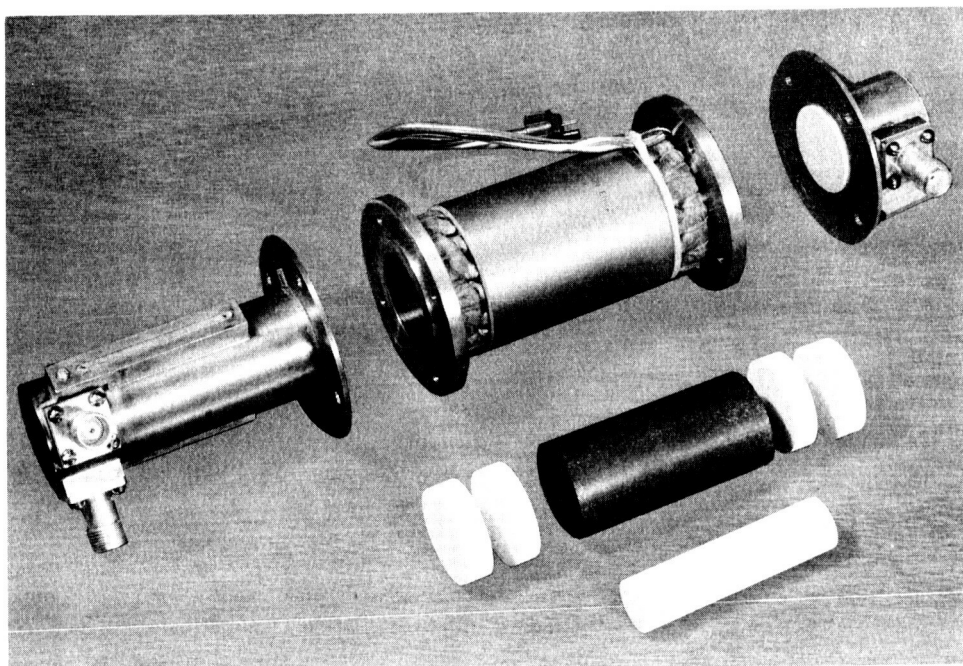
Exploded View of Breadboard Ferrite Phase Shifter
